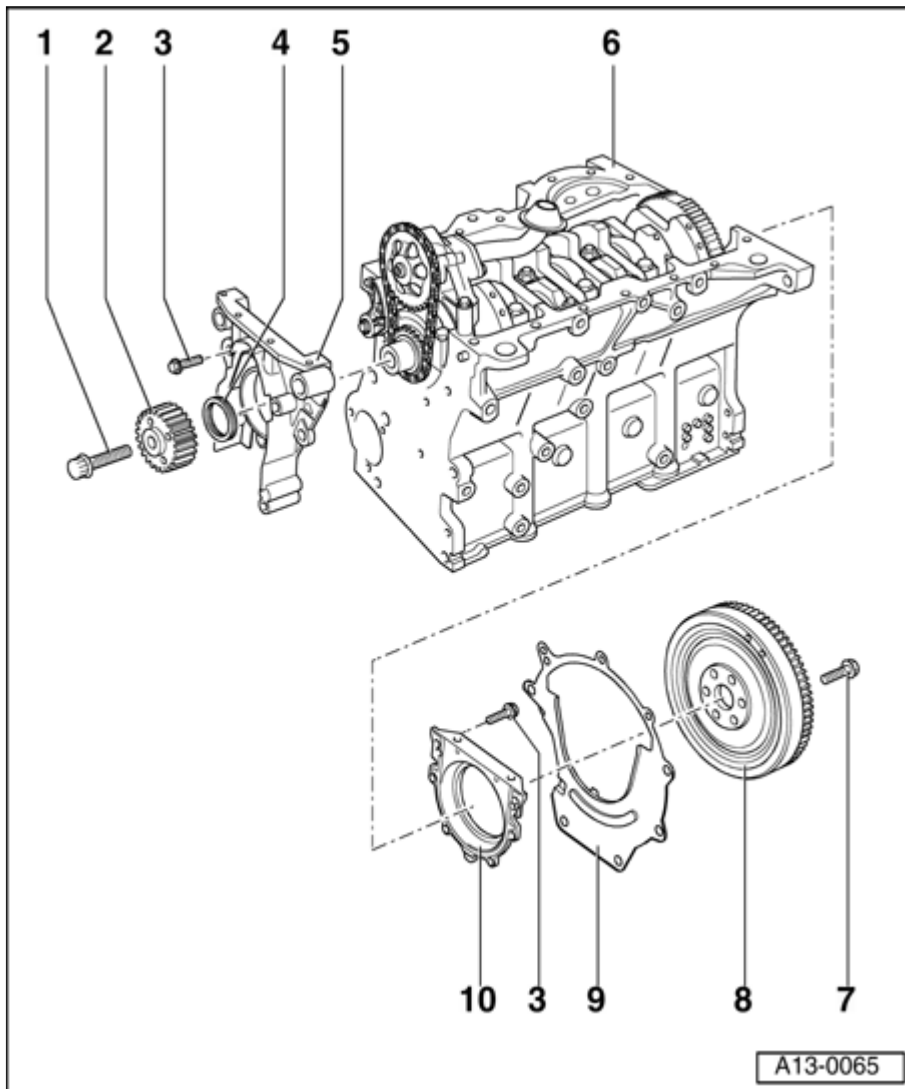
Identifying Sealing Flanges And Flywheel/Drive Plate
